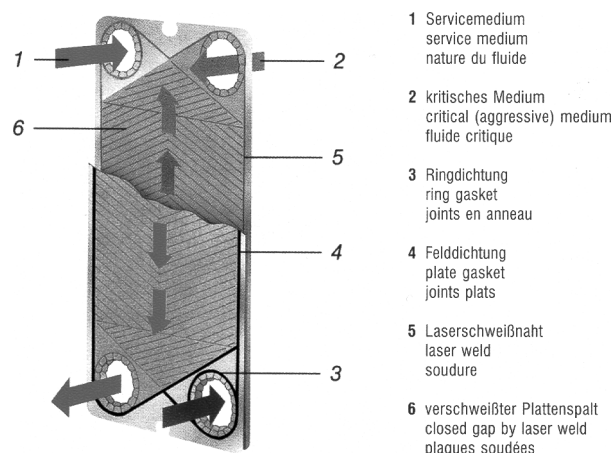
Construction of a welded module (Thermowave GmbH).
